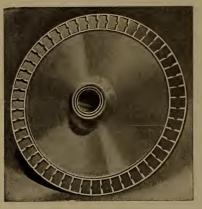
Wheel of Sturtevant Turbine with Buckets Milled from Side of Wheel
